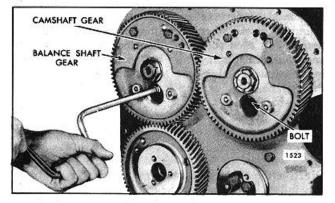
Removing or Installing Shaft Bearing Retainer Bolts
